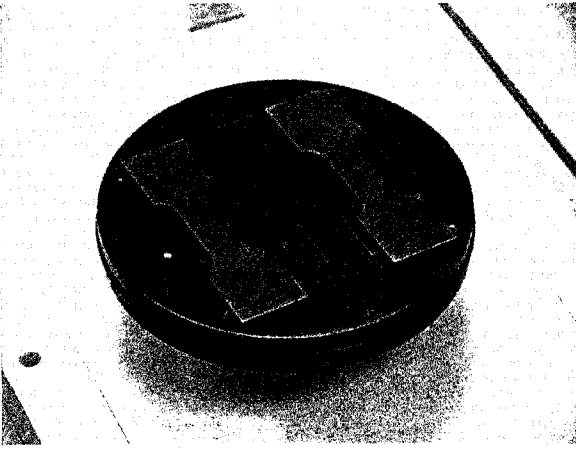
The fixture used to hold the specimens during grinding and polishing.
